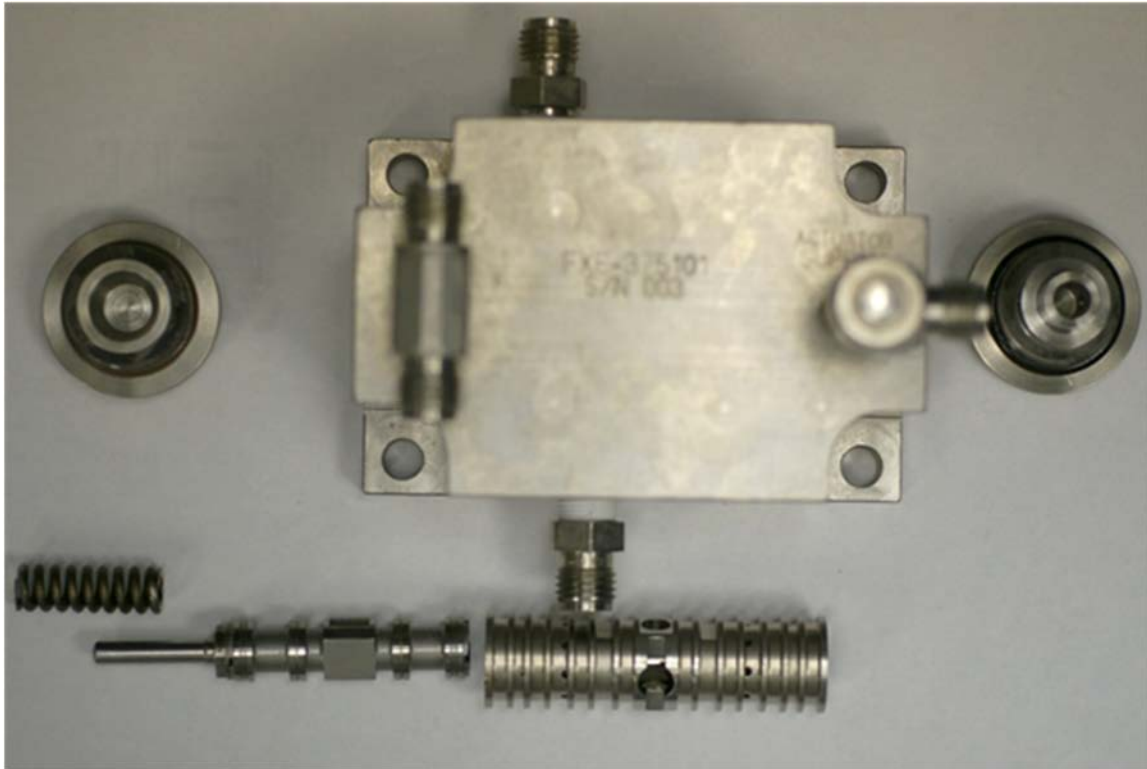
SV Assembly Showing the Body, End Caps, Spool and Sleeve
